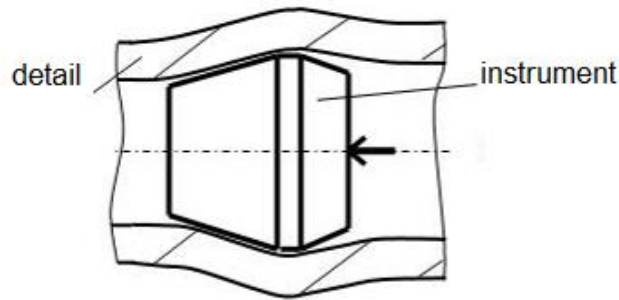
The traditional scheme of deforming broaching of tubular parts [5, p. 15].
